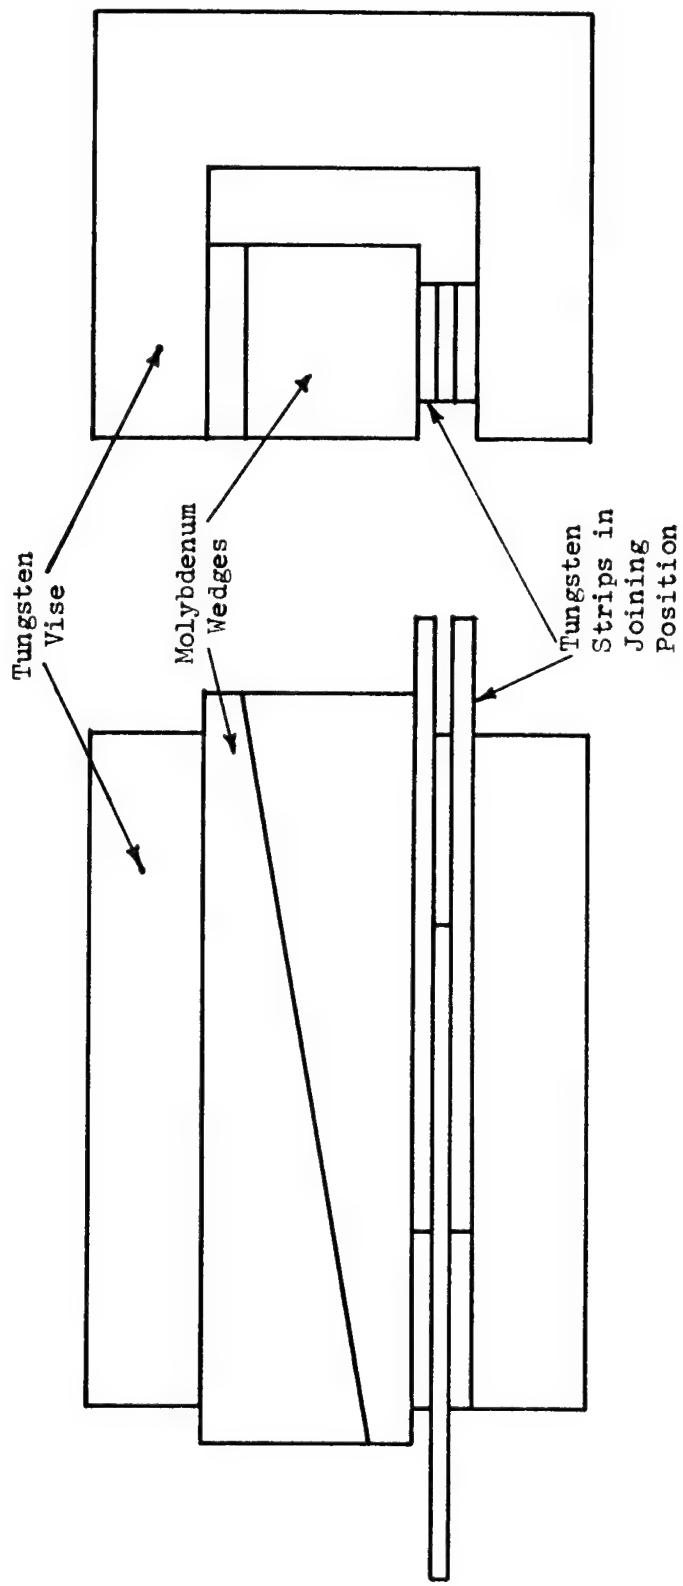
Schematic of High-Temperature Vise for Exerting Bonding Pressure through Thermal Expansion. (From: "The Activated Joining of Tungsten", by J. H. Brophy, et al. Welding Journal (September, 1963), p. 406-S, Reference 32).
